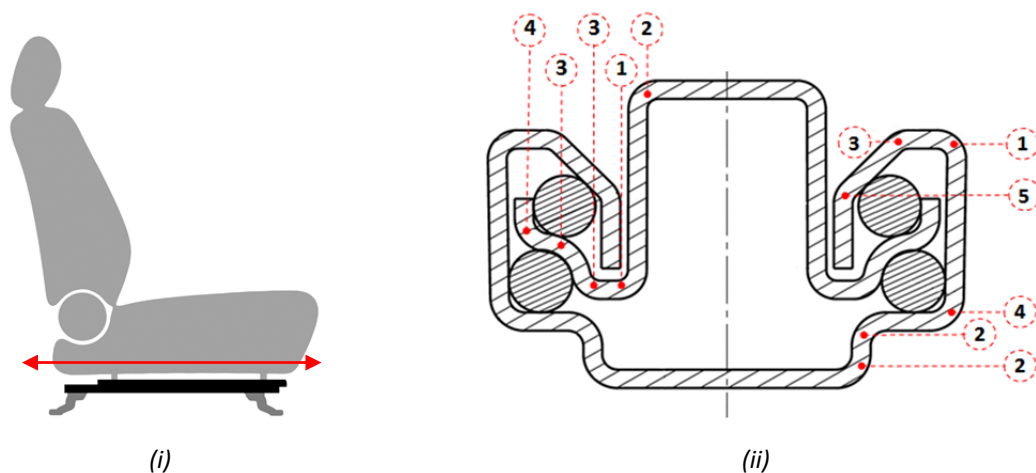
(i) Automotive seat and rail assembly (black) (ii) seat rail assembly section view including die-press folding sequence for upper and lower rails
